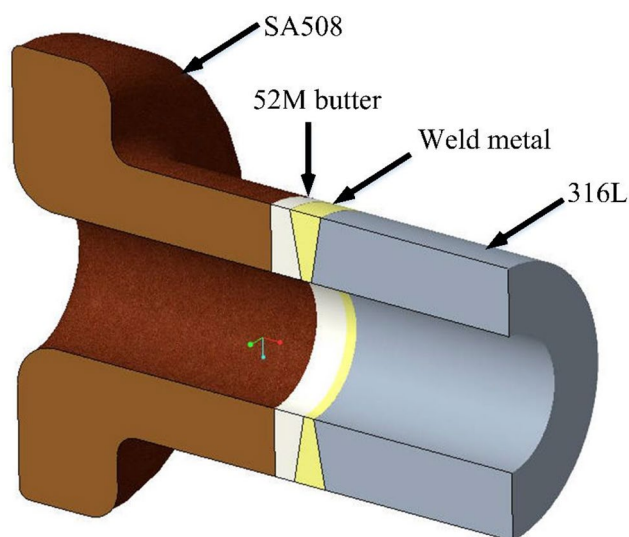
Dissimilar metal welded joints in reactor pressure vessel
